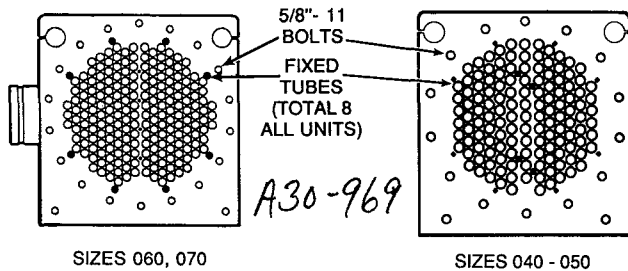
Typical Tube Sheets, Cover Off (Non-Removable Tubes)
